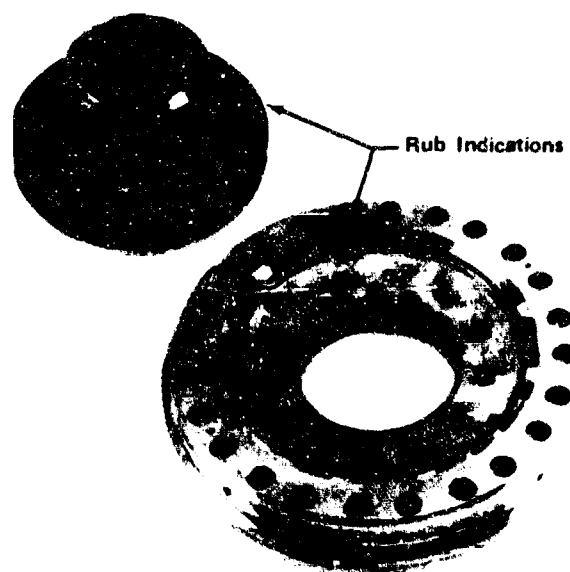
Post-Test View Showing Light Rub Indications on Thrust Piston Front Face Outer Seal
